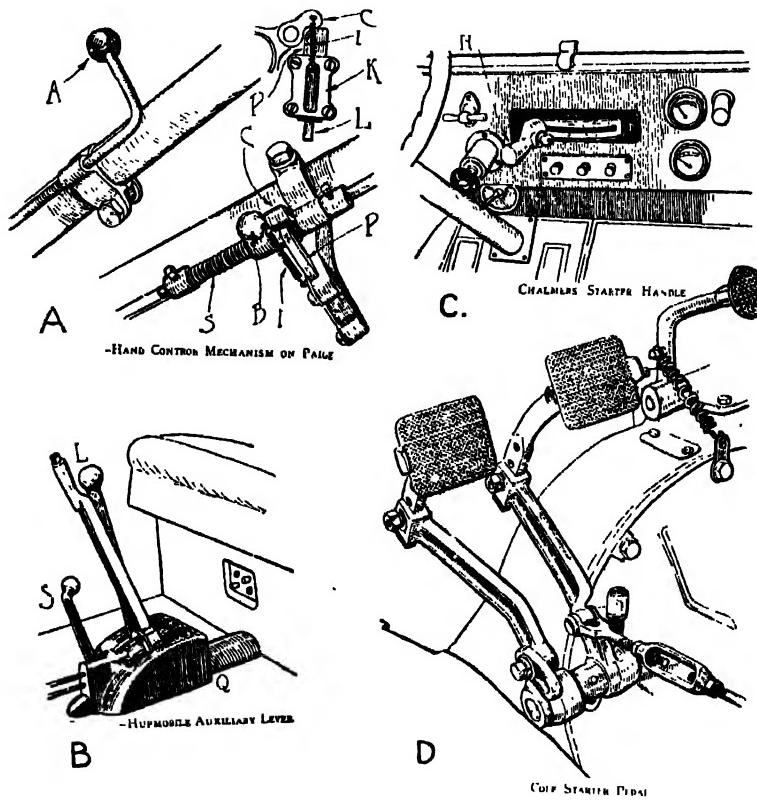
Conventional Method of Engaging Starting Gearing.
